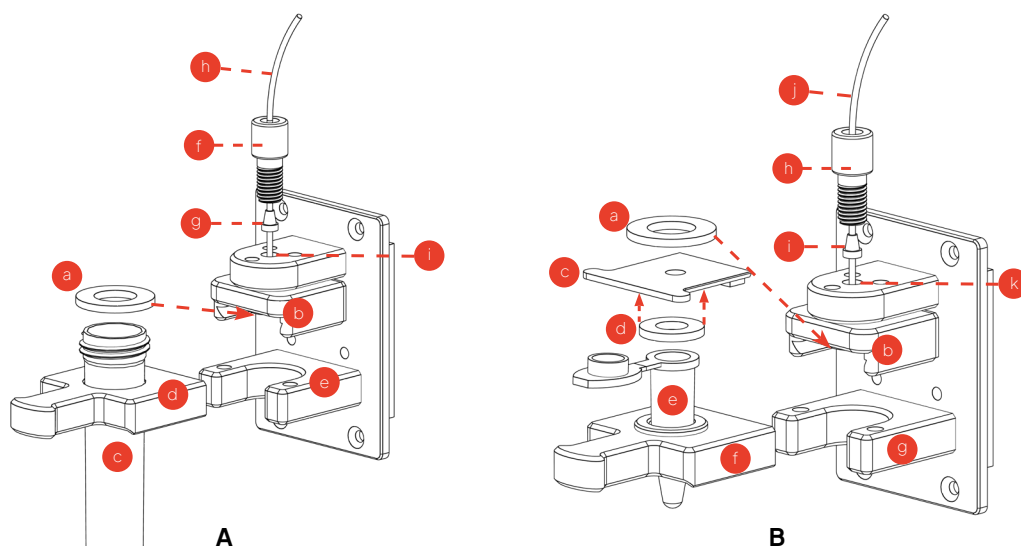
Pressurizable channel components; A - 5 and 15mL tubes, B - 1.5mL tube.
